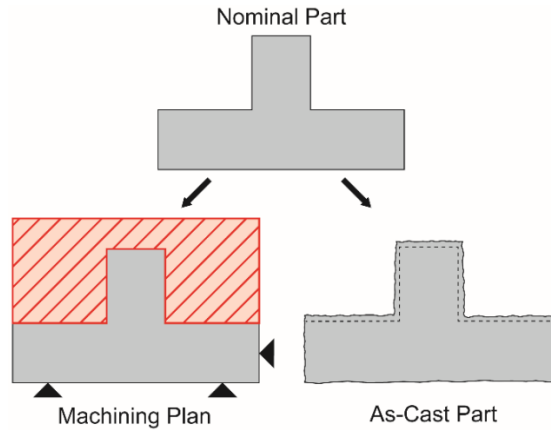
Deriving the Machining and Casting Plan from the Nominal Part
